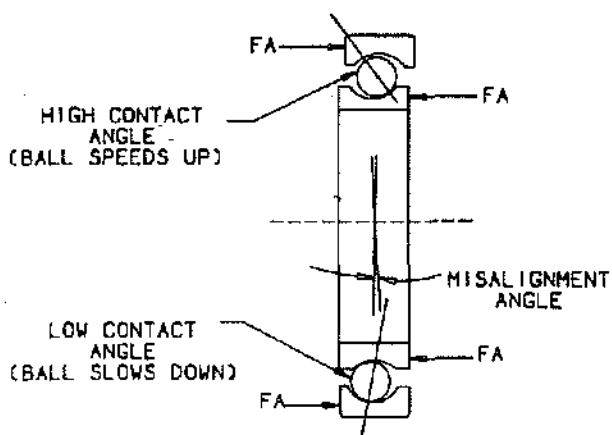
Ball Bearing With Angular Misalignment Between Inner & Outer Races
